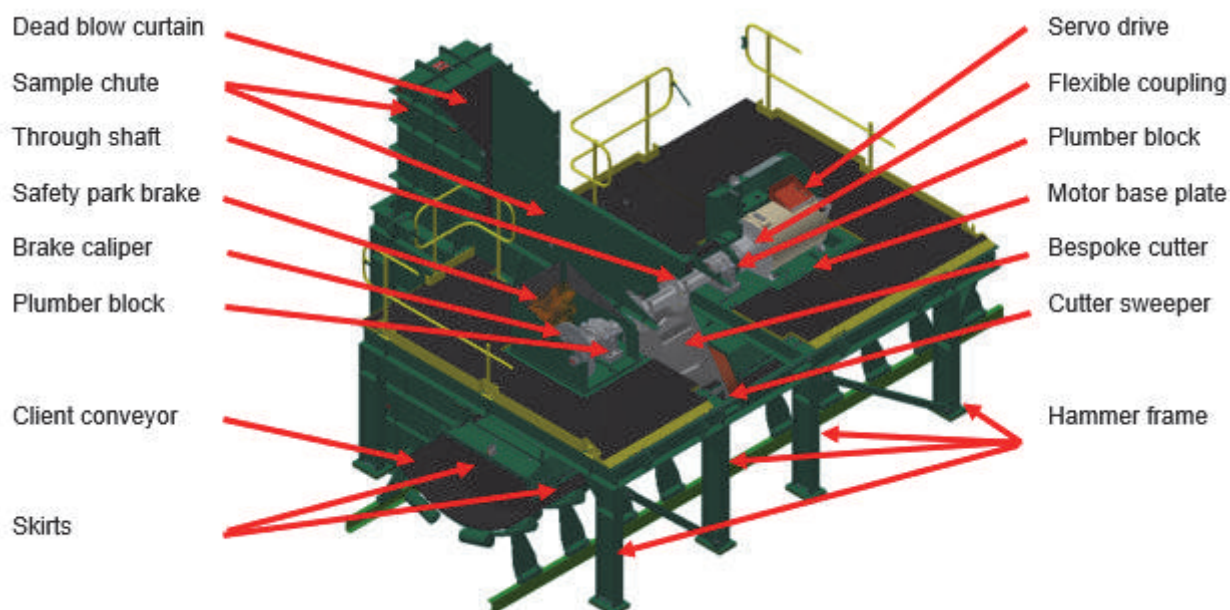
Main components of a hammer sampler seen from the park brake end –sectional view now including hammer integral support frame.
